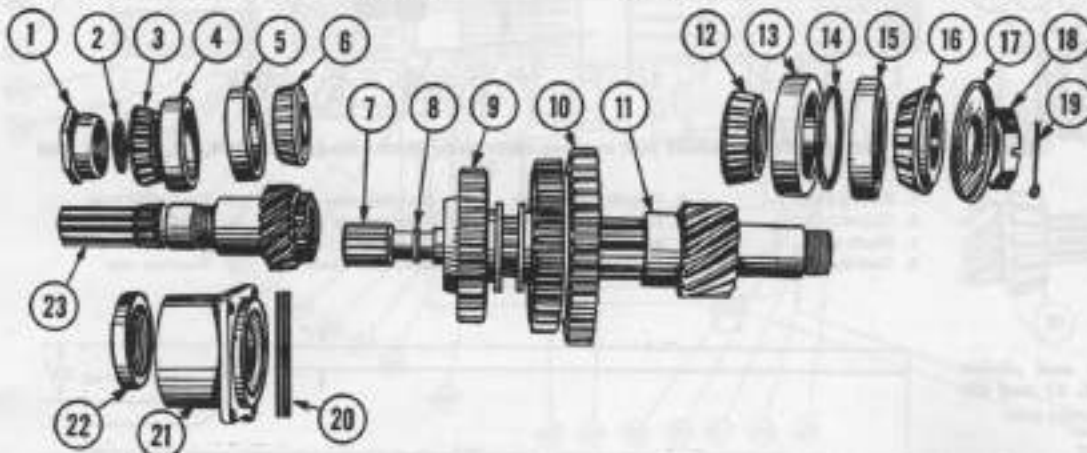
Transmission mainshaft assembly—Models 20, 20K, 22, 22K, 81 and 82.
